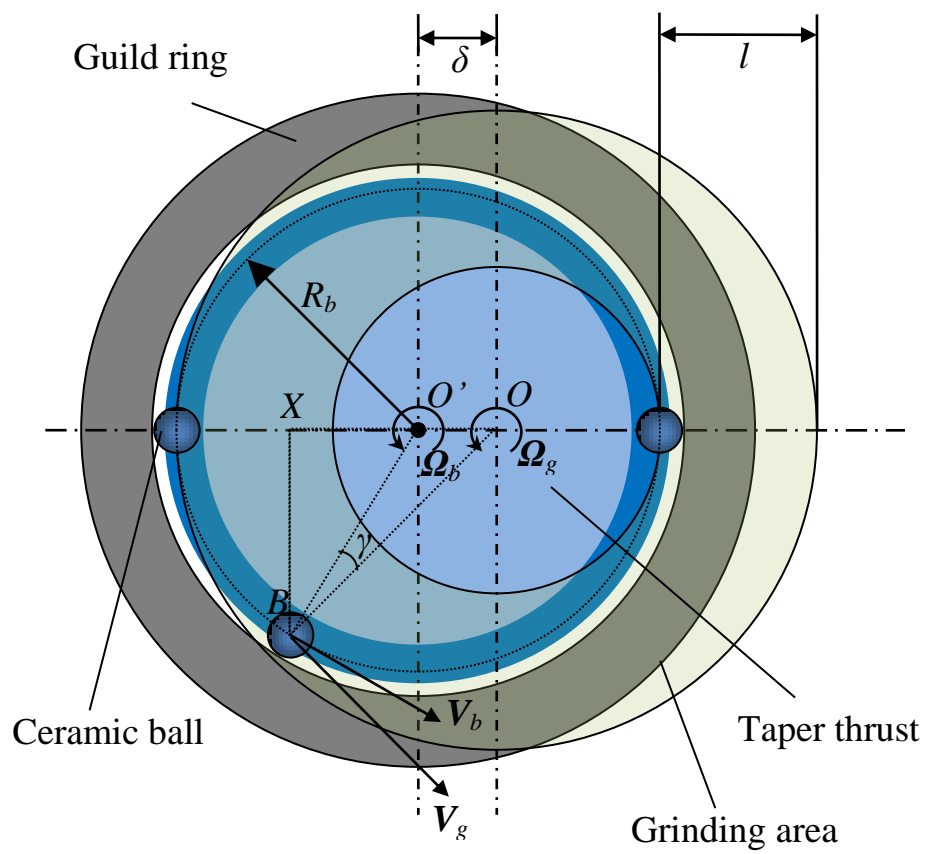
Top view of the eccentric V-groove grinding mechanism
